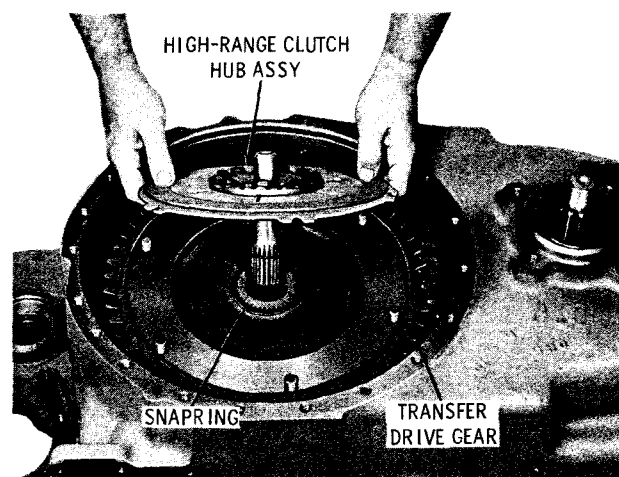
Removing high-range clutch hub assembly (no power takeoff)
